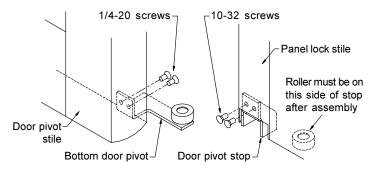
Installation of Door (SX) Bottom Pivot Assembly for Fixed Panel Application
